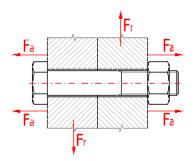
Various types of load for calculations of the assemblies by bolt. 2.2 of the Type load: This list makes it possible to the users to define the type of the load which acts on the assembly. The assembly by bolt can be conceived for the following types of load:
